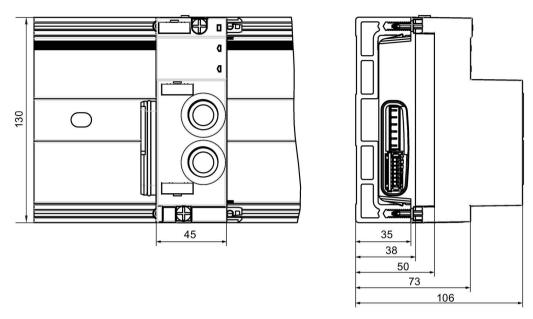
Dimensional drawing of the power module with CM PM Direct connection module
